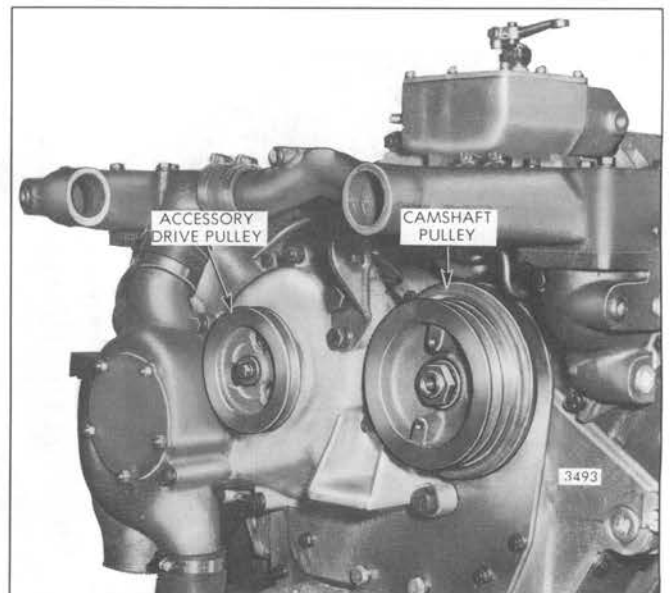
Front Mounted Accessory Drive Pulleys (6V and 16V)
